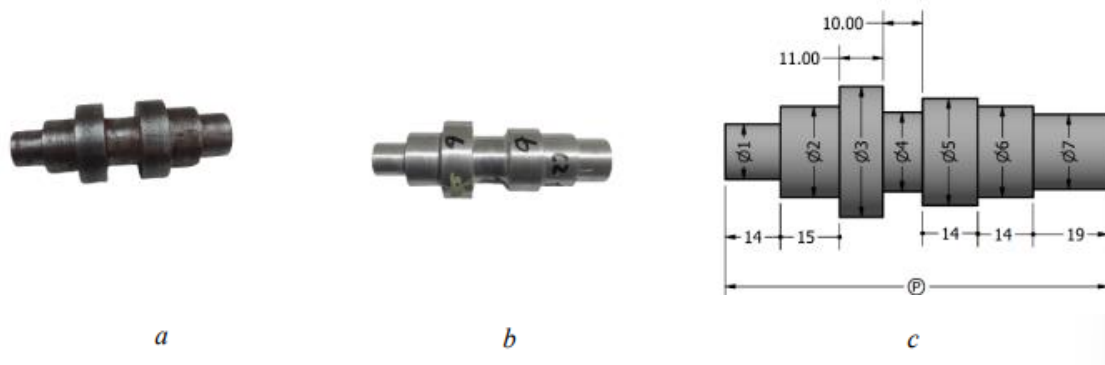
Shaft Pattern (a) Casting Product (b) CAD Design (c)
